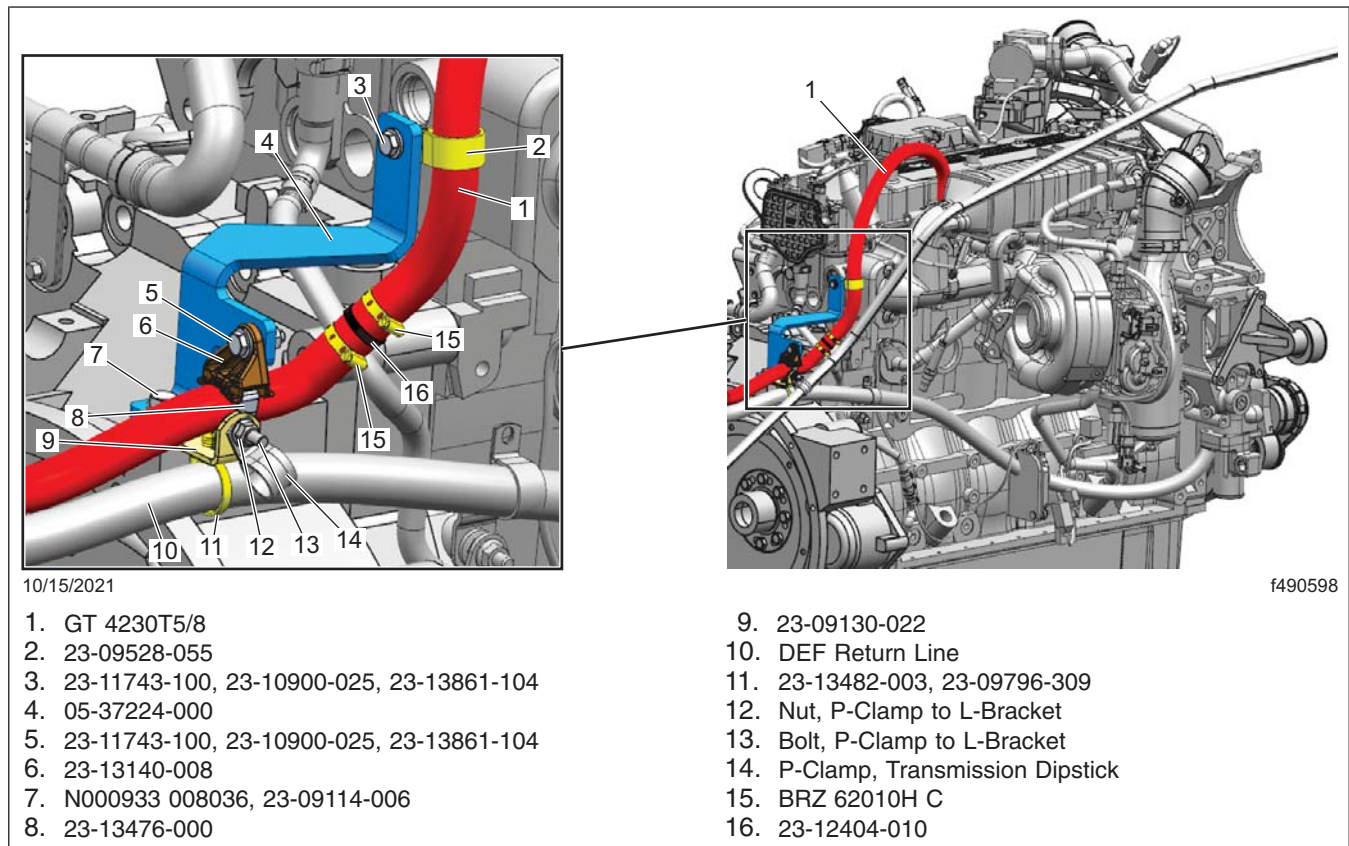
, Mounting, New DEF Coolant Supply Soft Line
